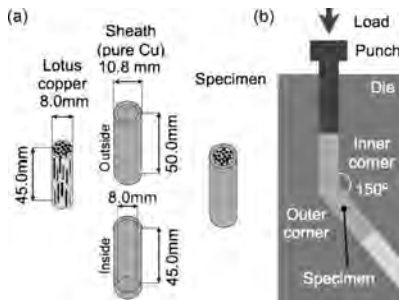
Schematic drawings of the samples (a) and ECAE process (b).
